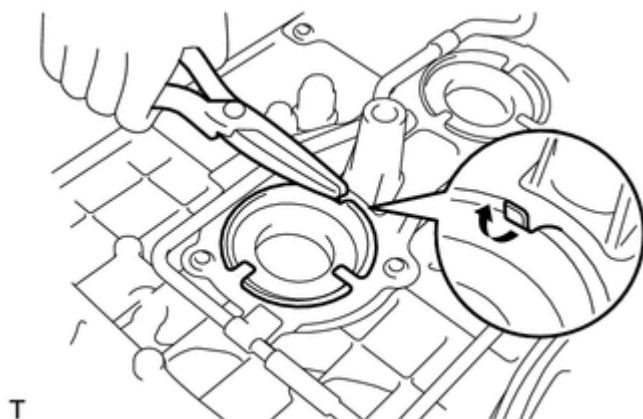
Bending Ventilation Baffle Plate Claws On Cylinder Head Cover
